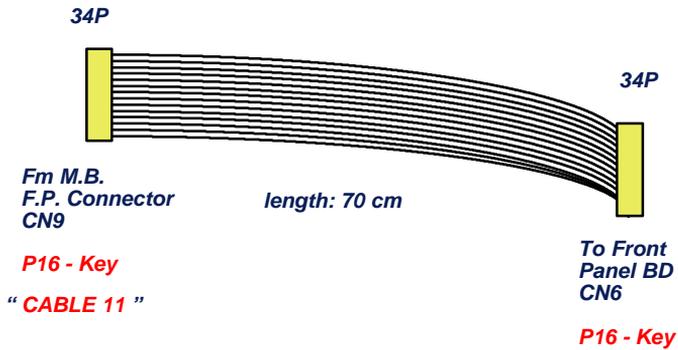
31 Cable 11 Definition for the Front Panel Board
